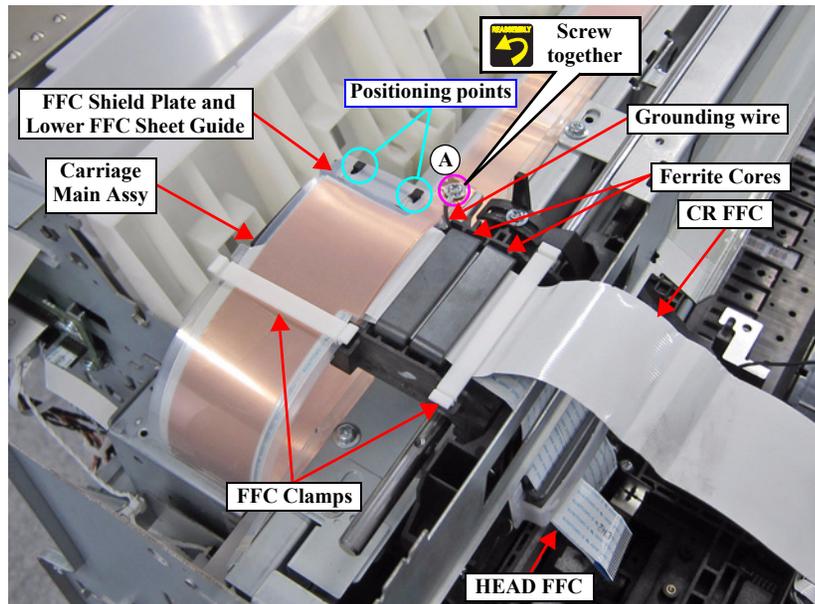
Removing the HEAD FFC (Top of the CR UNIT)
